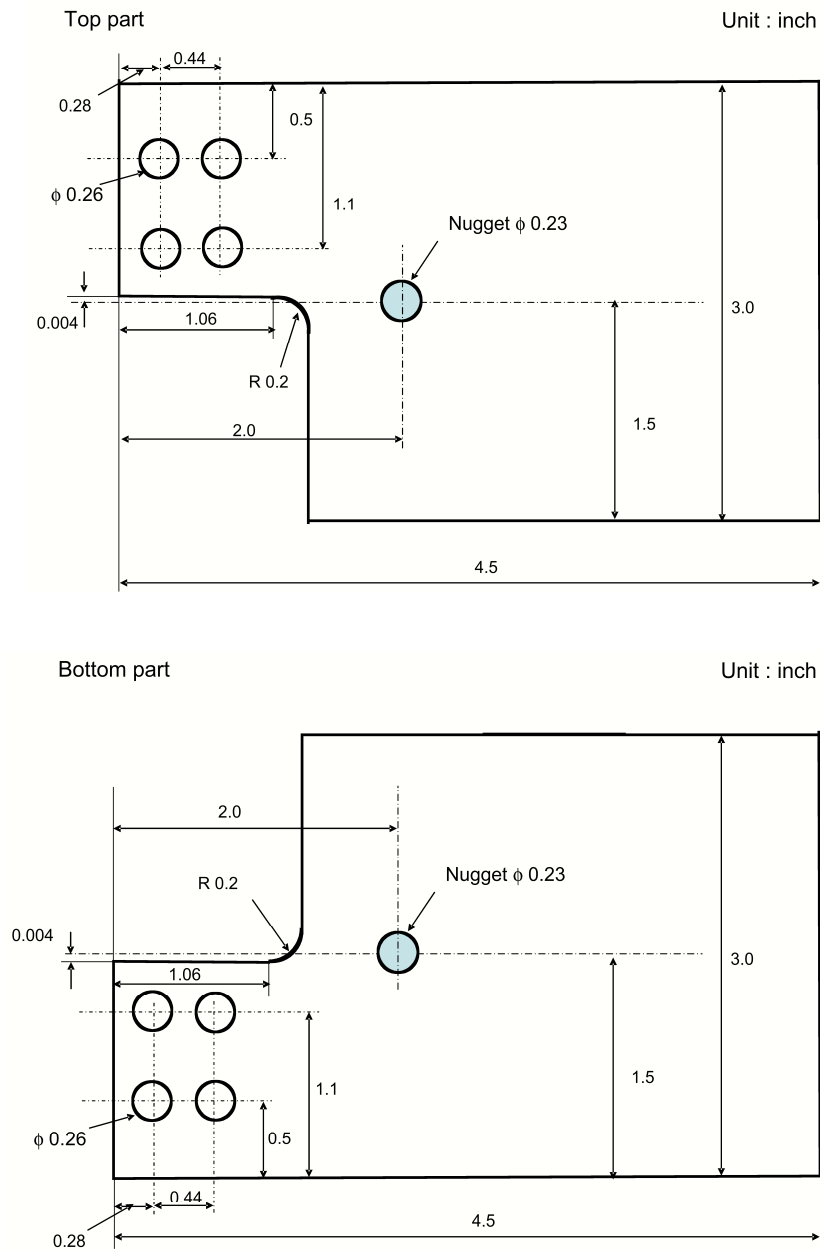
Geometry and dimensions for the mixed-mode specimen (in inches)
